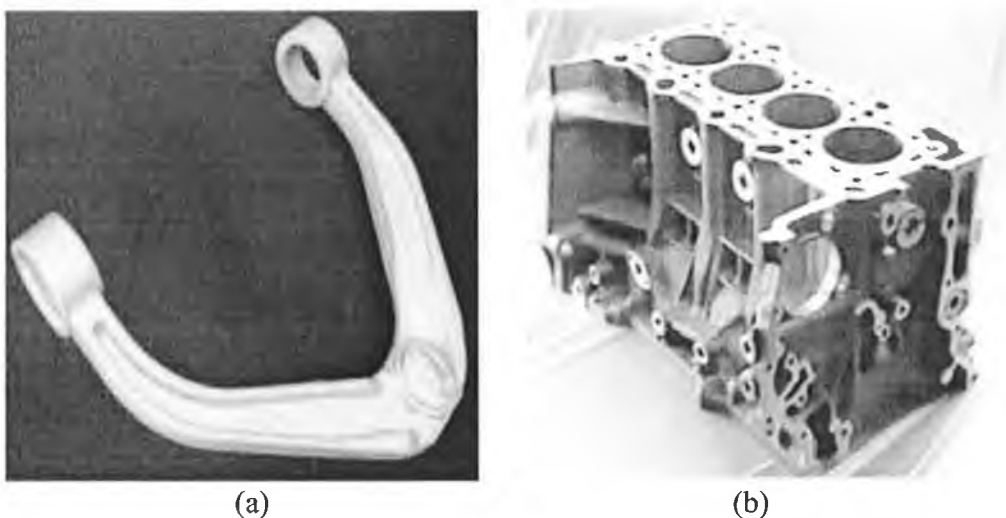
Thixoformed automobile (a) suspension arm and (b) cylinder block [18, 99]
